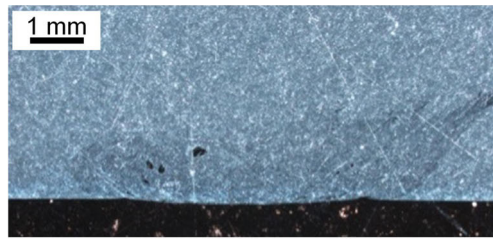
Welding parameters rotational speed, feed rate, and probe-tip-to-interface distance
